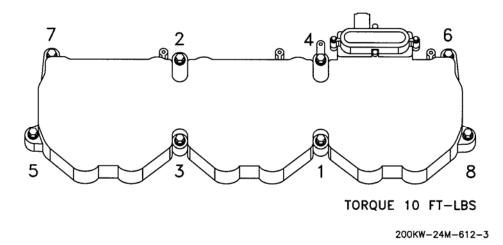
Valve Cover and Base (Sheet 3 of 3).
